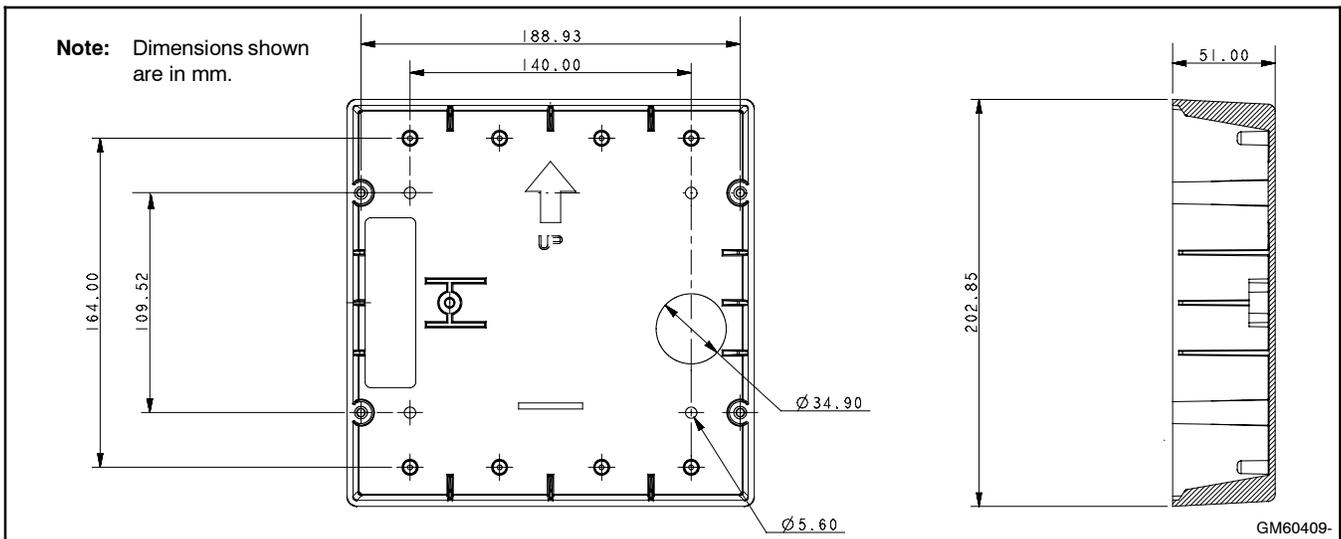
RSA II Mounting Hole Dimensions in Supplied Box GM60409
